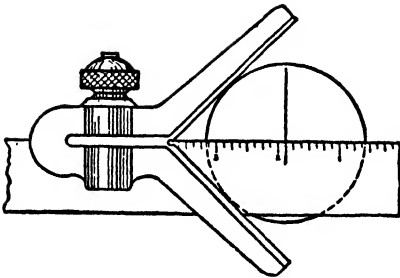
Using a center head to locate a center. (South Bend Lathe Works)
